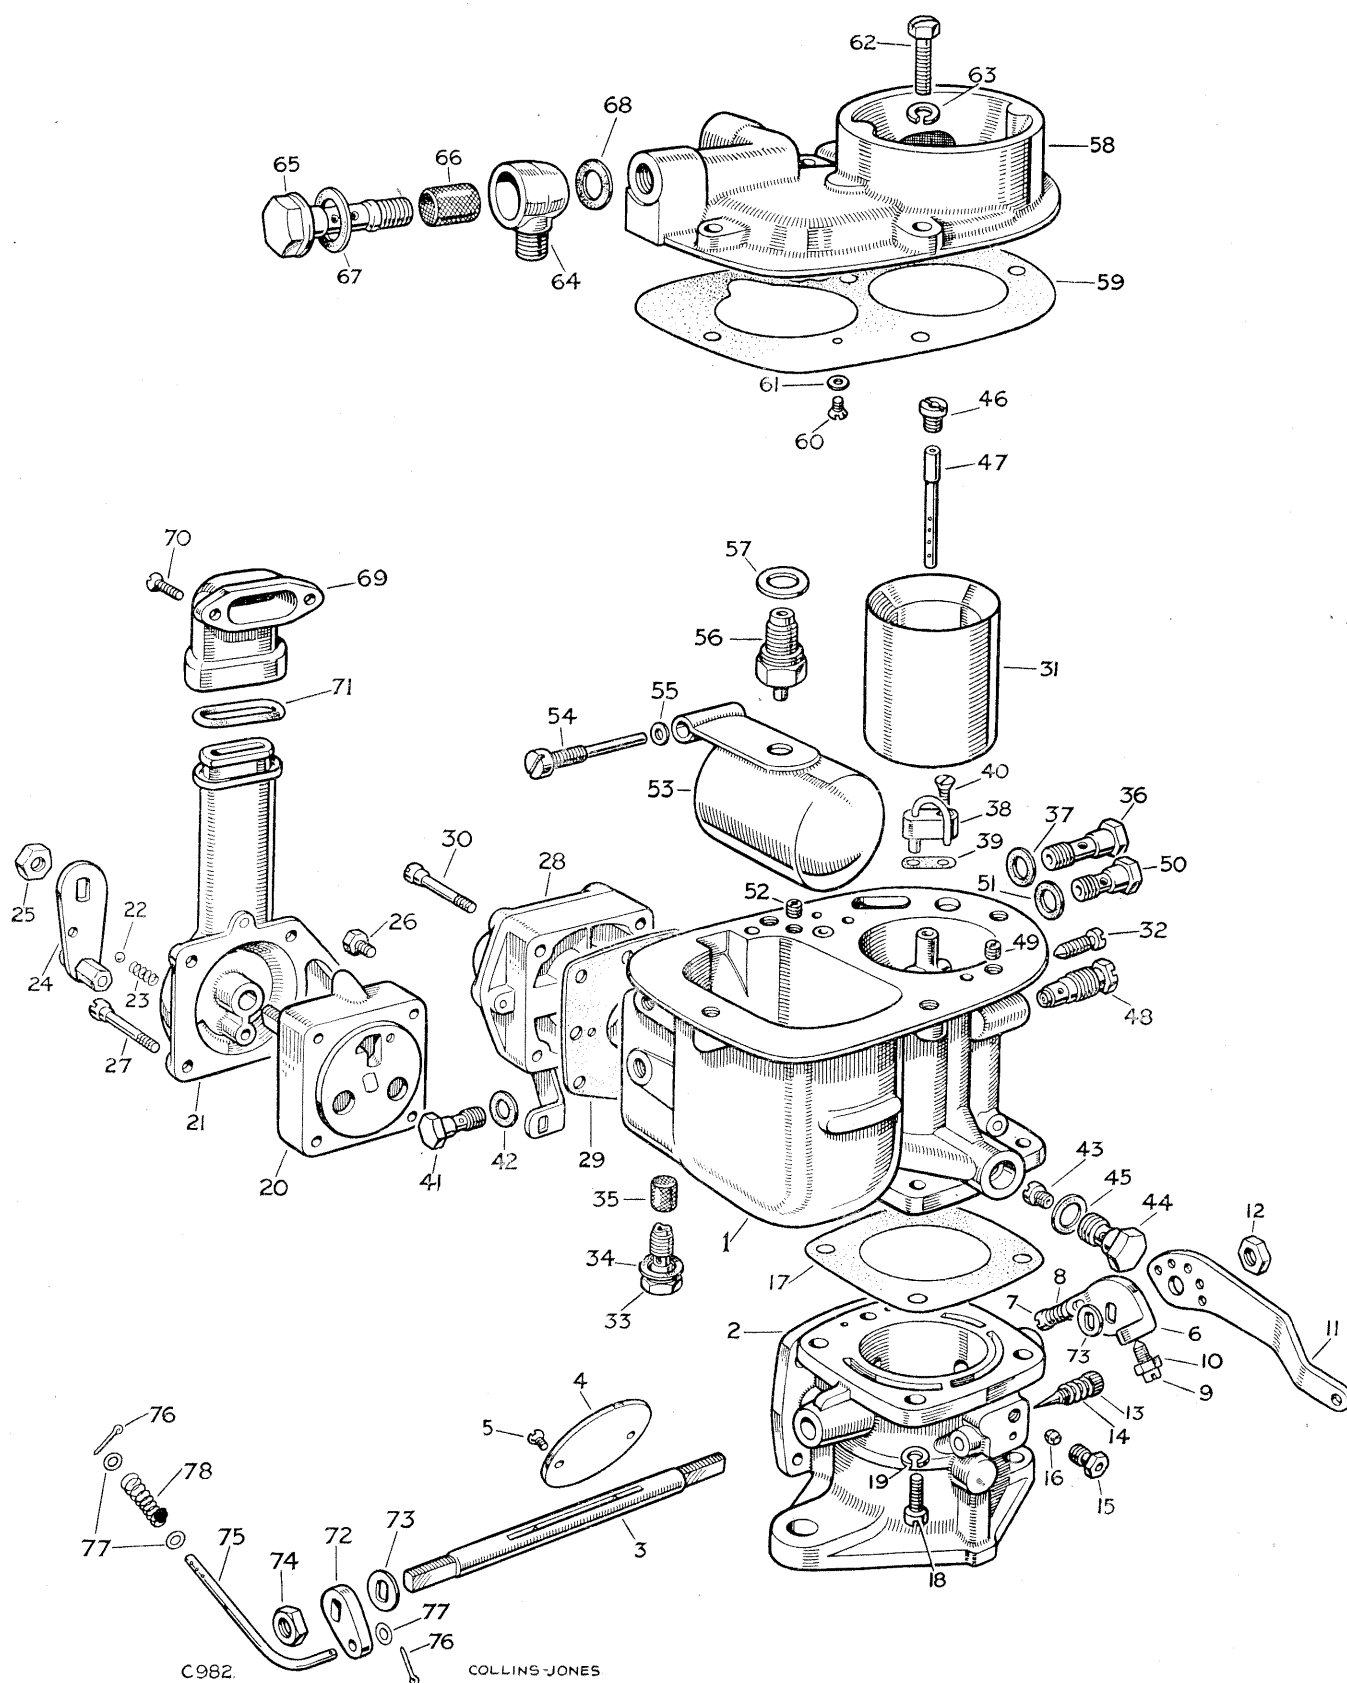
Layout of carburettor, 2½ litre Petrol
